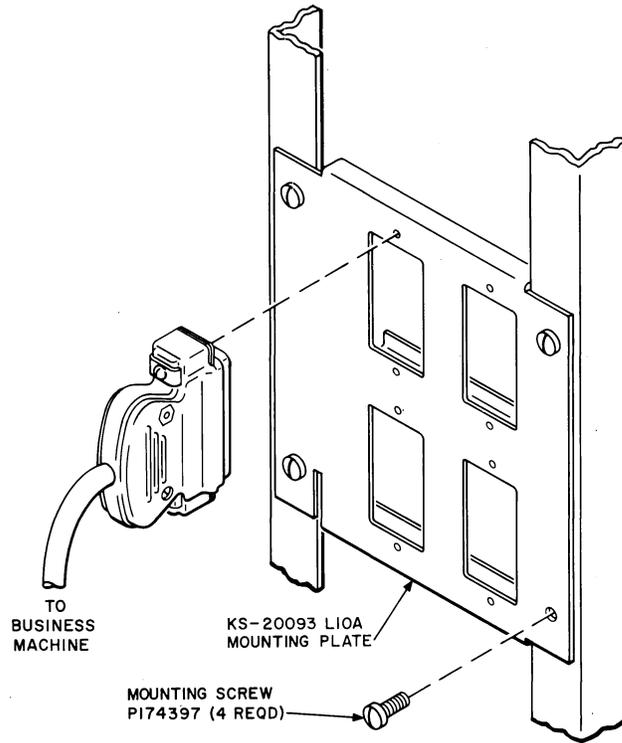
Installation of an L10A Mounting Plate Showing the Mounting of a Customer Interface Connector
